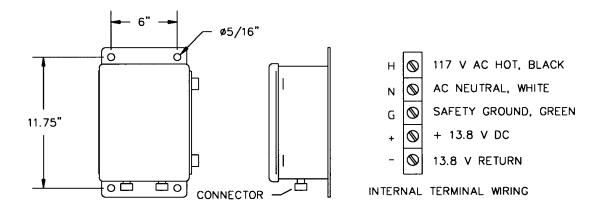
13.8 V DC Power Supply Mounting and Connecting Details
